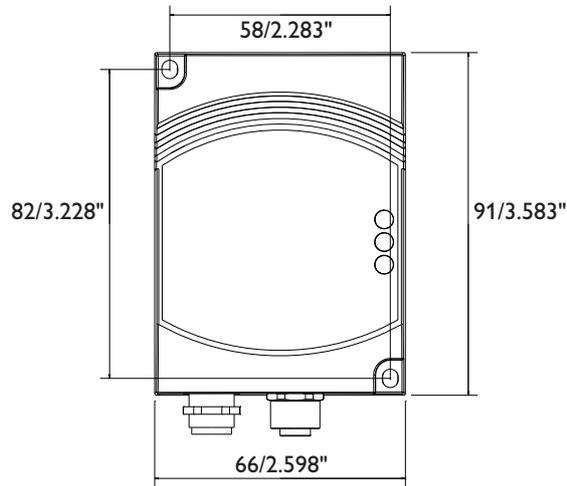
Housing dimensions and drill hole spacing for the device in millimeters (inches)
